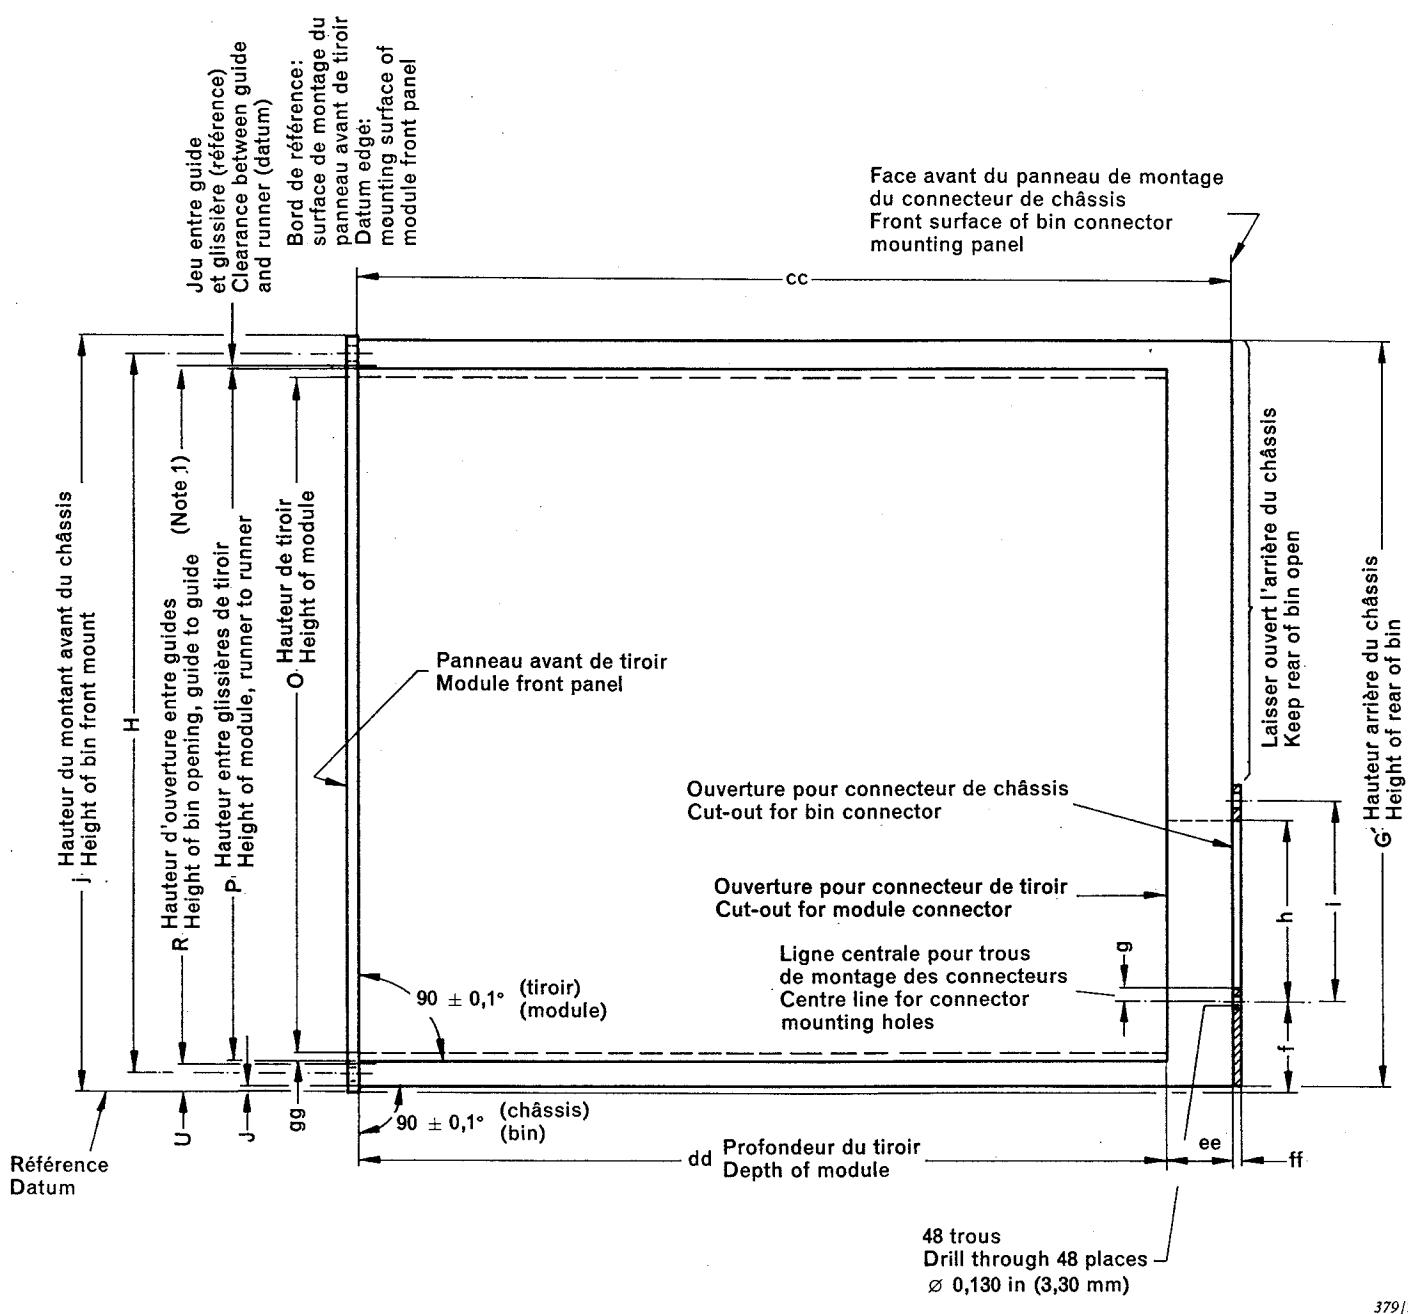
Dimensions of the rack mounting unit Type NC — Front view.
